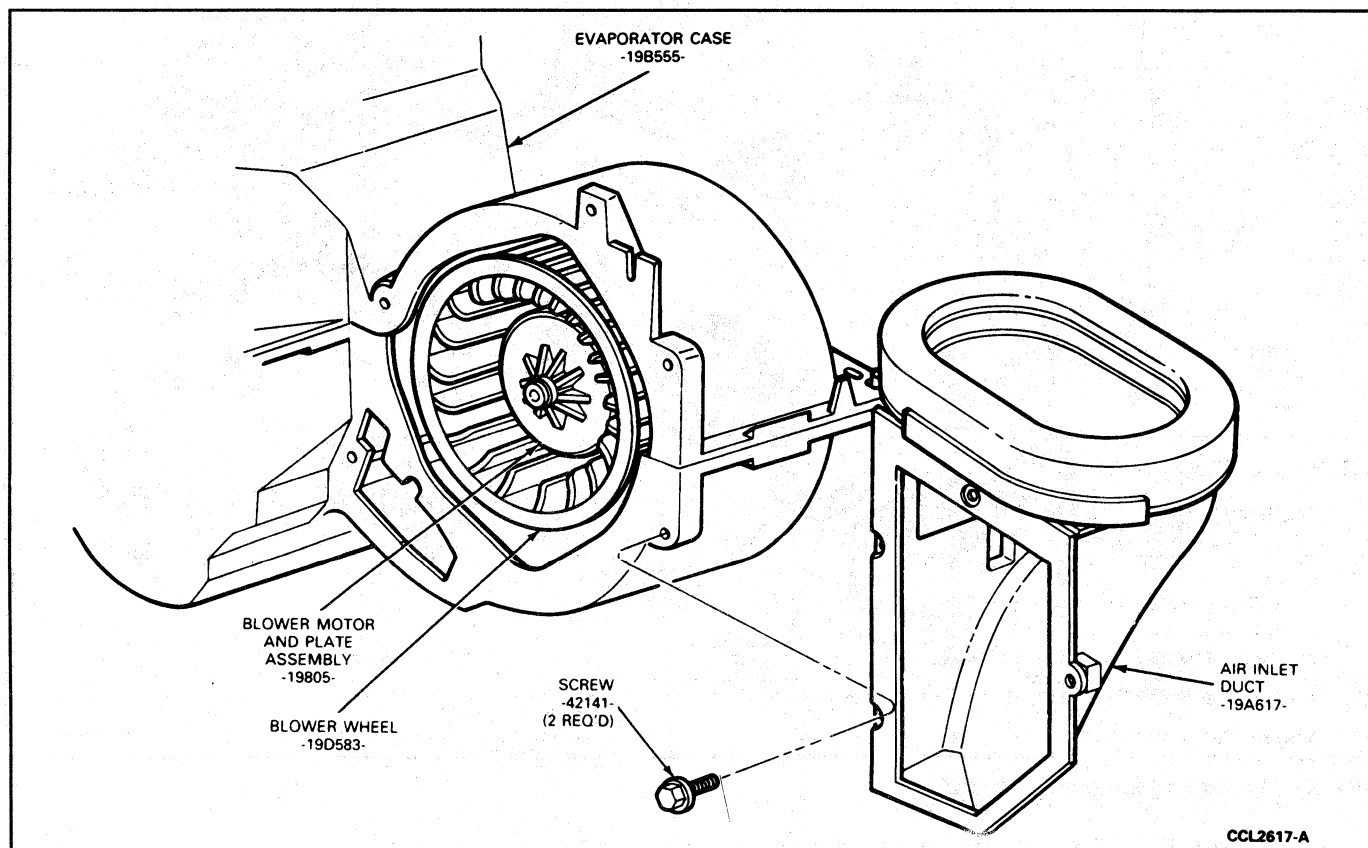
Air Inlet Duct Removal from Evaporator Case
